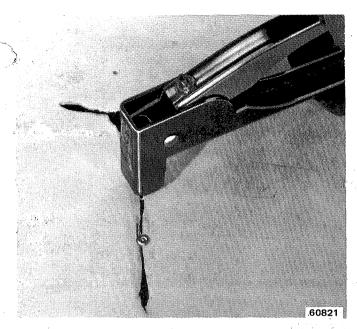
L-7 Installing Pop Rivets in Crack
